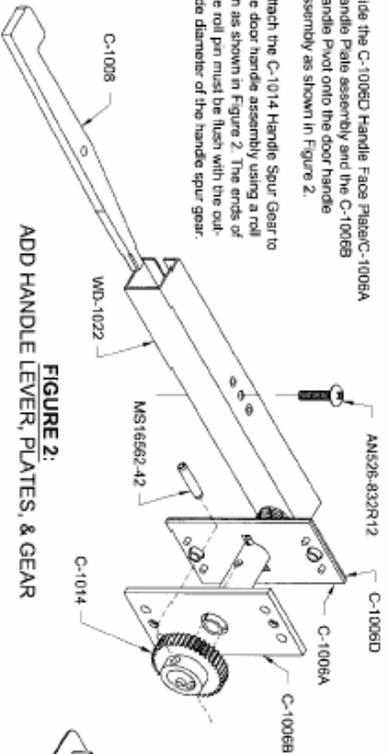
ADD HANDLE LEVER, PLATES, & GEAR
